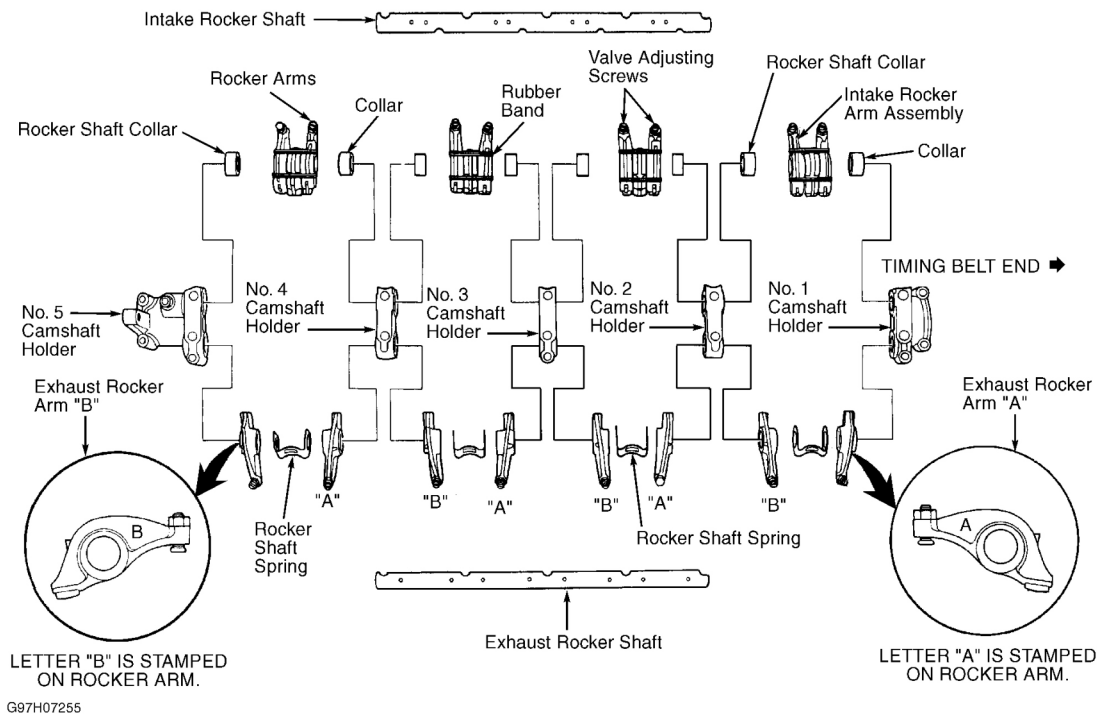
Identifying Rocker Arm Assembly Components (D16Y8 Engine - VTEC)
